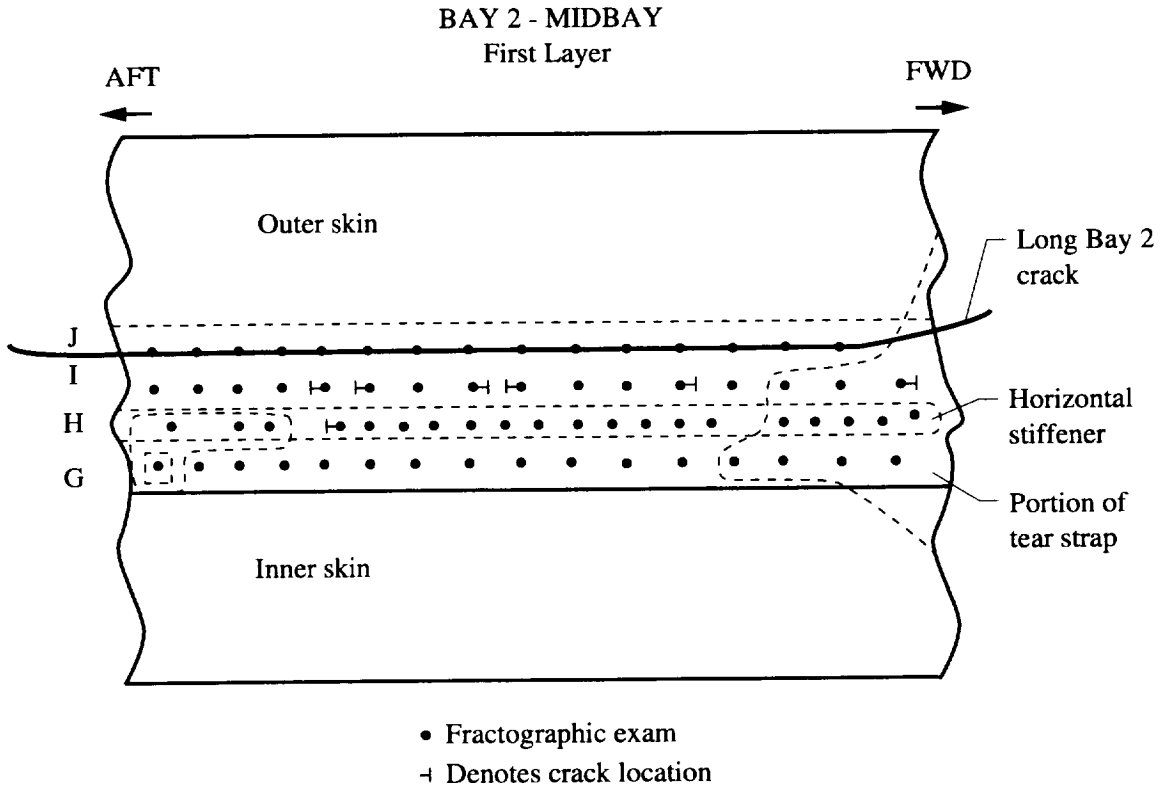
The schematic shows the location of fatigue cracks found in the first layer (outer skin) of the bay 2 lap splice joint by destructive examination. The long bay 2 crack is visible in row J.
